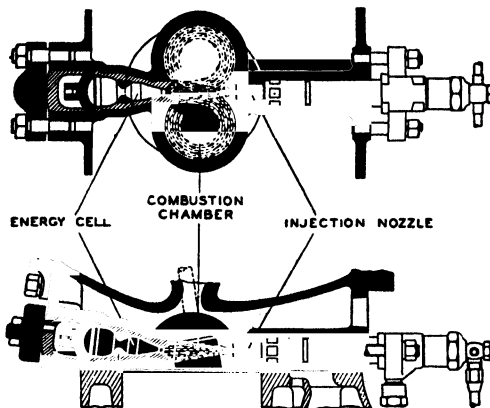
Schematic drawing of the Mack-Lanova combustion system.
